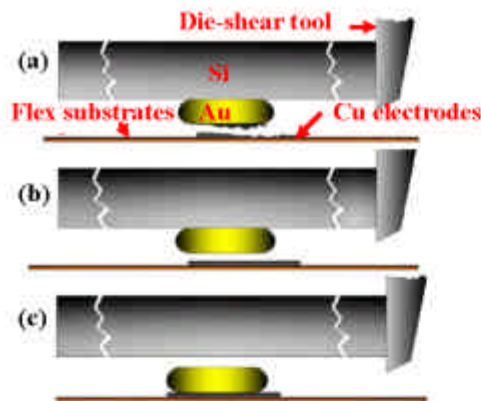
A sketch to illustrate the fracture modes of chips and flex substrates assembly after the die-shear test, (a) the deposited layers of copper electrodes was pulled-out by gold bumps, (b) gold bumps peeled-off of the surface of copper electrodes, (c) gold bumps peeled-off of the surface of bond pads of silicon chips.
